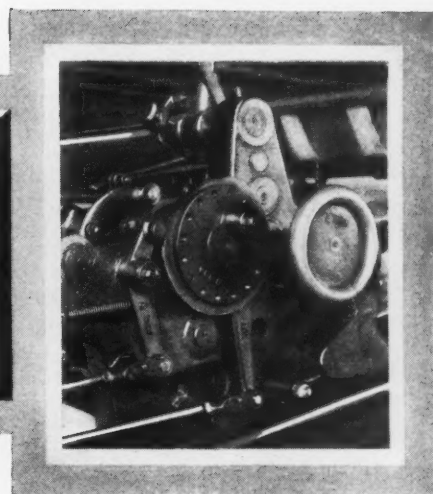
Frame Jaw Milling Machine Set up Ready for Milling
